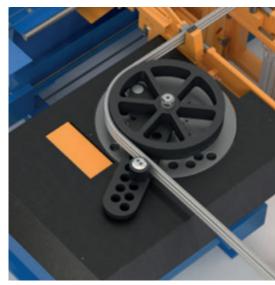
Special fixture for the use of bending rollers up to 670 mm in diameter
